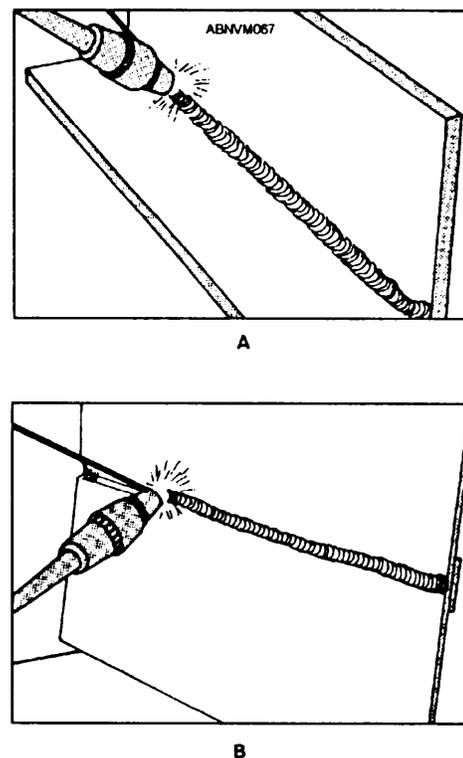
Welding a fillet and butt joint in the horizontal position.
